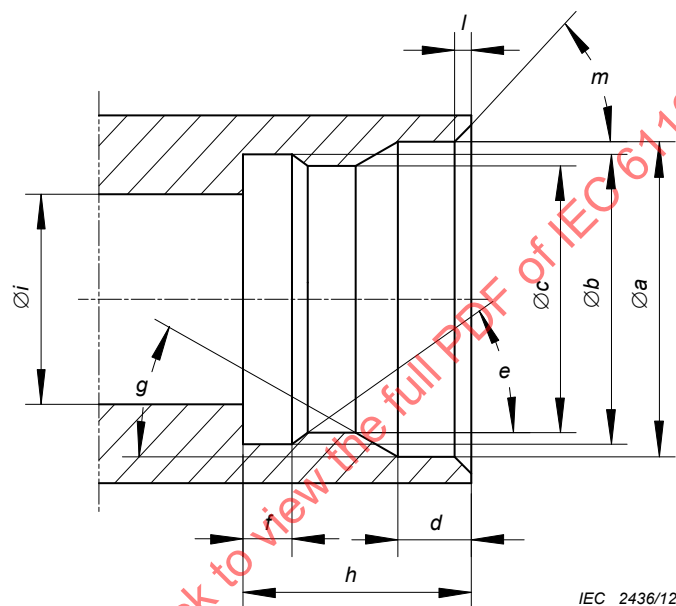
Gauge pin – Full detent for outer contact of connector with socket-centre
